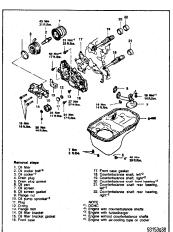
Exploded view of the balance shaft assemblies—2.0L and 2.4L engines
